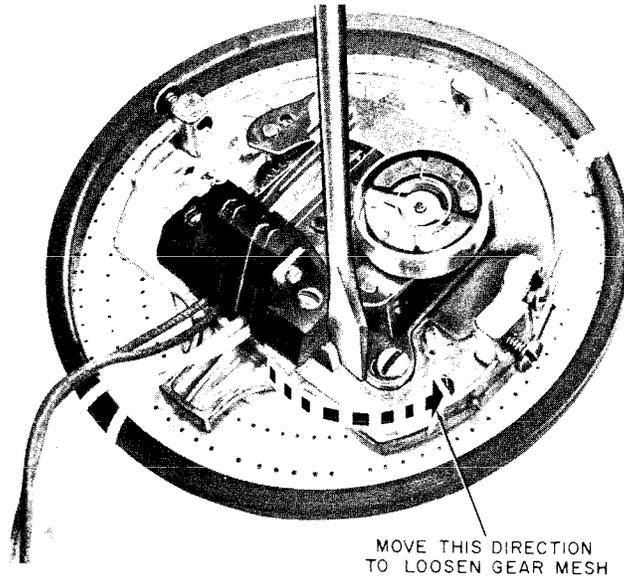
Using Screwdriver to Tighten Gear Mesh
